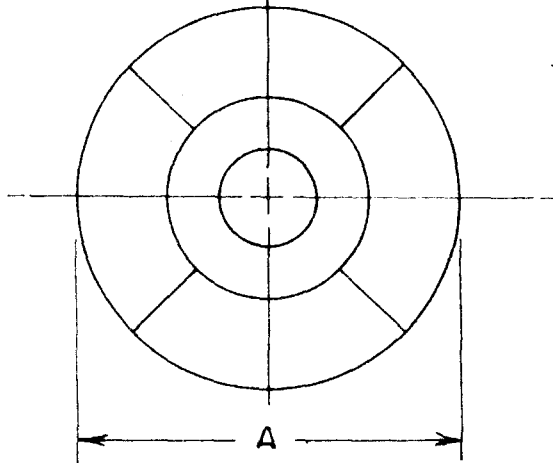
MOUNTING DETAILS, AXIAL D-CER
